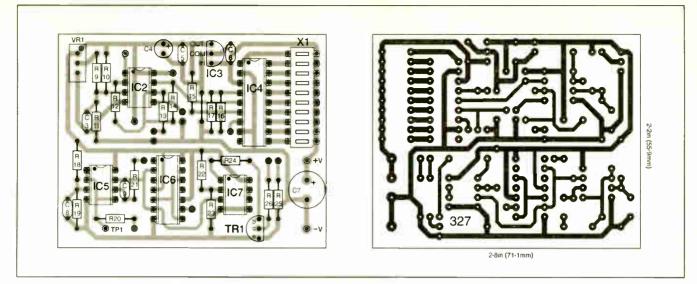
Main printed circuit board topside component layout and full-size underside copper foil master pattern.
